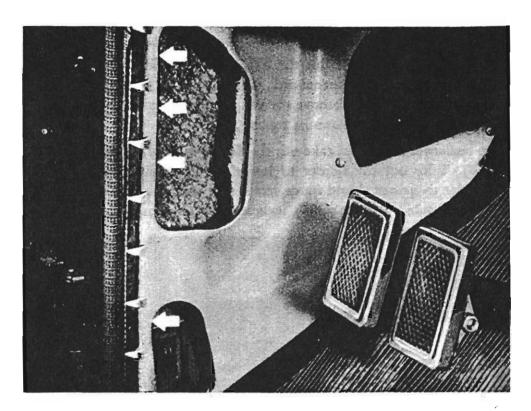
The Fender To Cowl Bolt Retaining Nuts Are Accessible Through the Openings in Cowl Side Panel.
